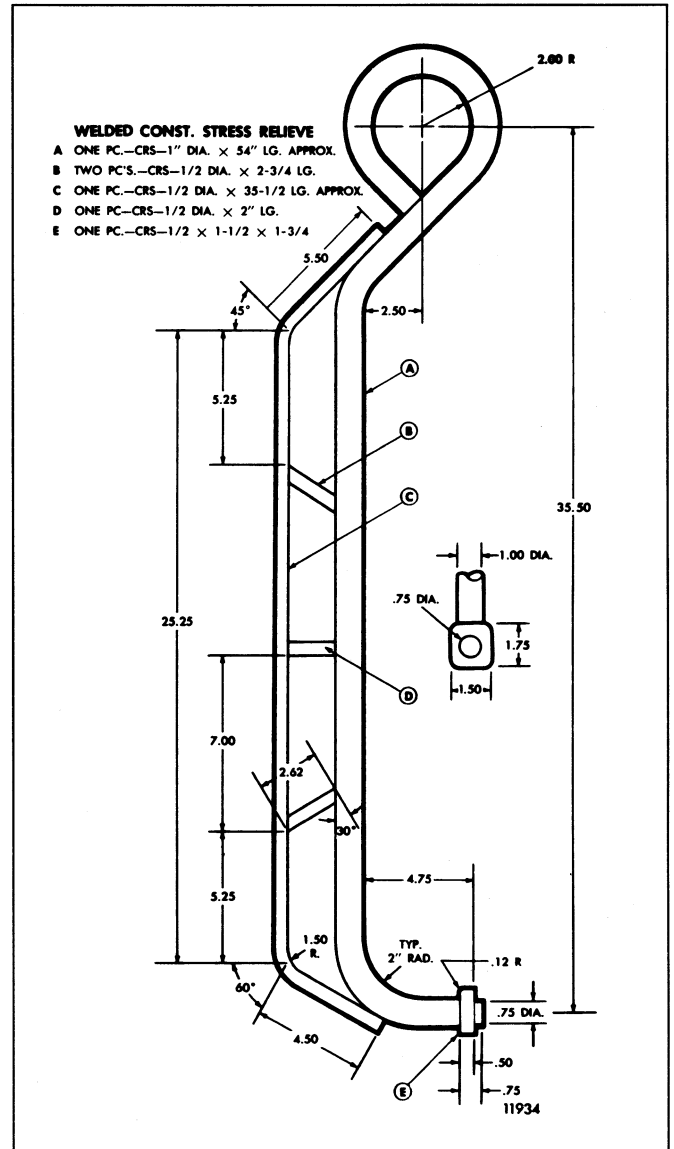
Details for Fabricating Flywheel Lifting Tool
